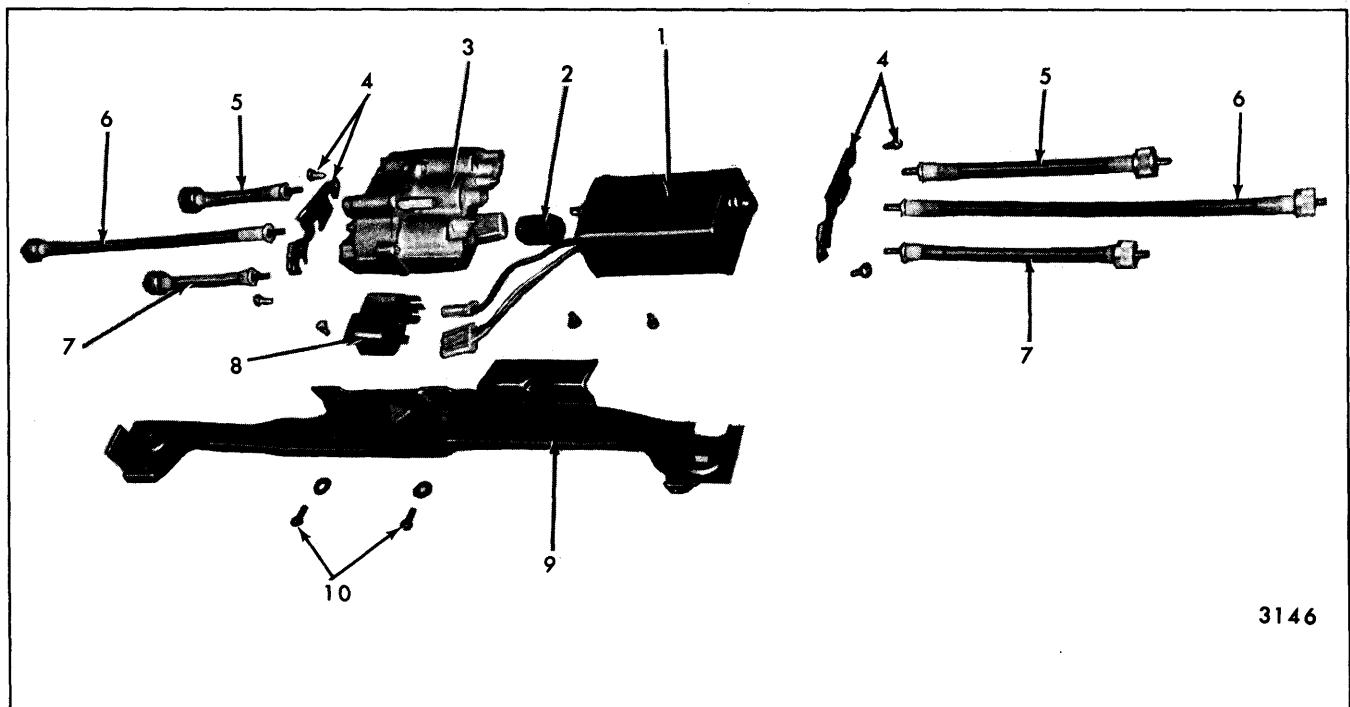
Six-Way Seat Adjuster Motor, Transmission, Cable and Support - Disassembled - Buick, Oldsmobile and Cadillac 60-40 Seats
